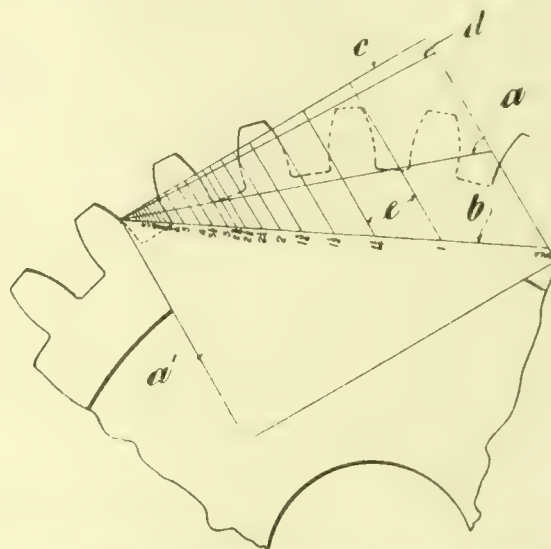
CRABTREE'S GAUGE FOR GEAR WHEELS.
